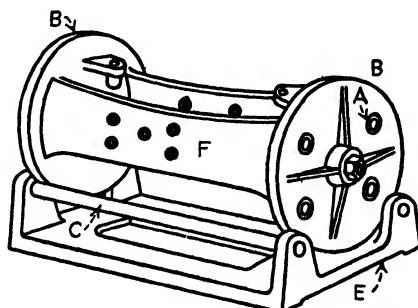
Cradle jig. This jig can also drill end holes when removed from cradle. Bushings are at *A* in the ends *B*. These ends roll on bars *C* which are held in base *E*. Cradle is removed for drilling end holes.
